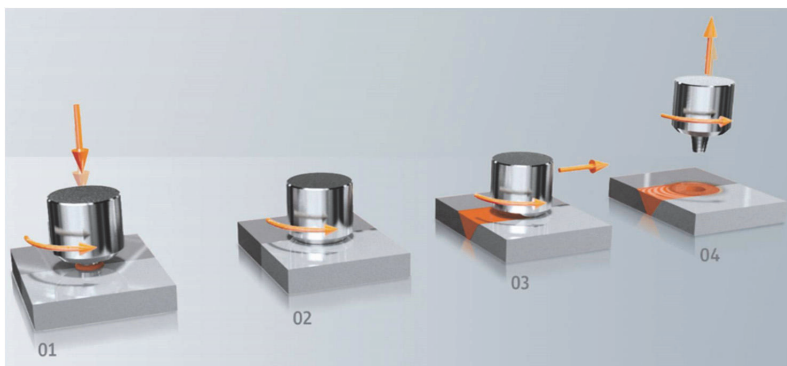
Process steps: (1) approach and plunge; (2) dwell for heating; (3) welding; (4) end of welding.
